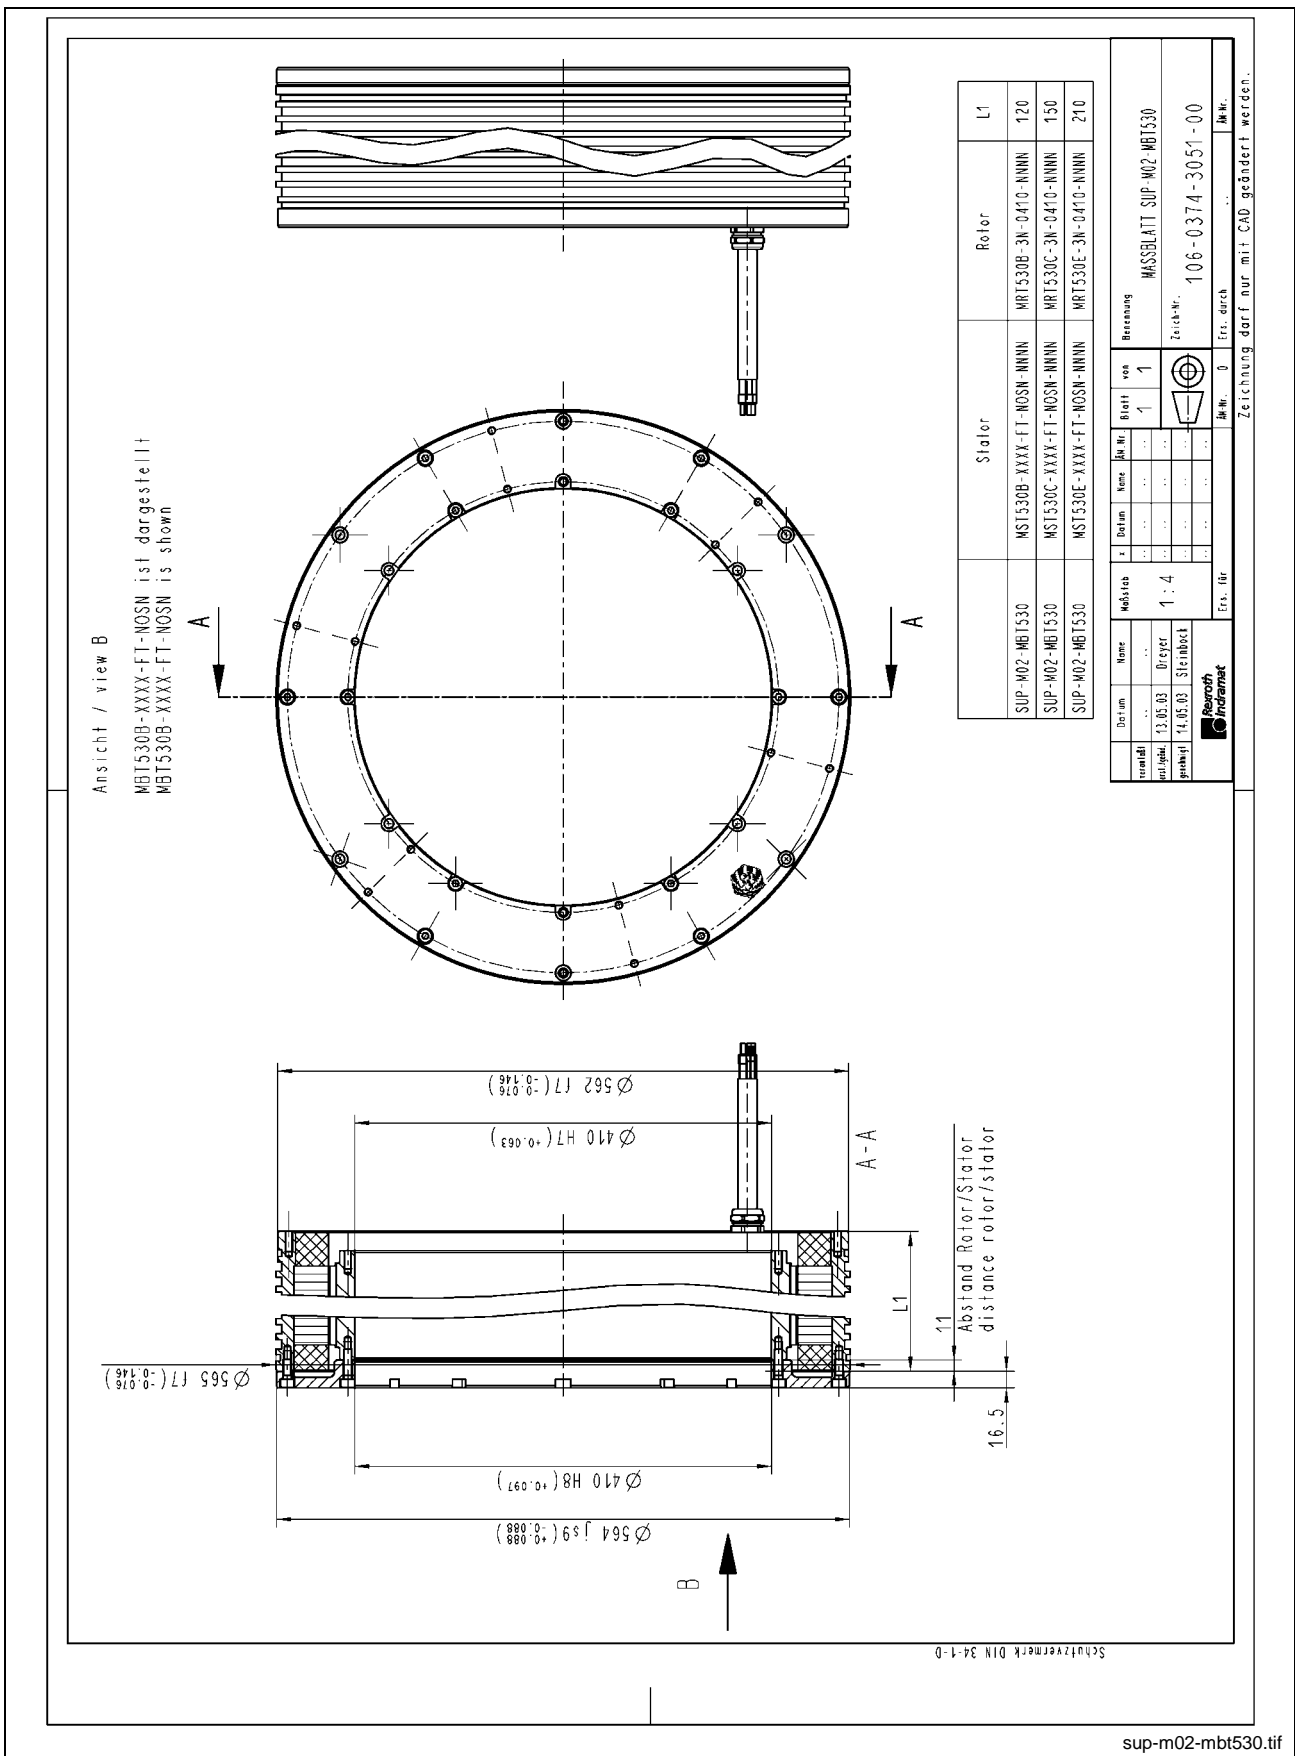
Dimension sheet for mounting ring in SUP-M02-MBT530
